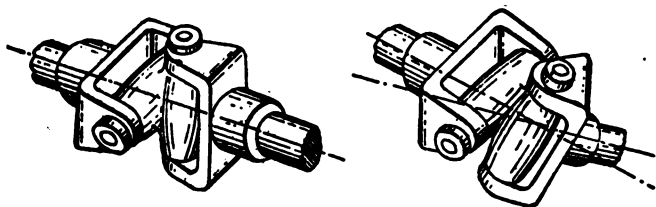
TYPICAL UNIVERSAL JOINT.
